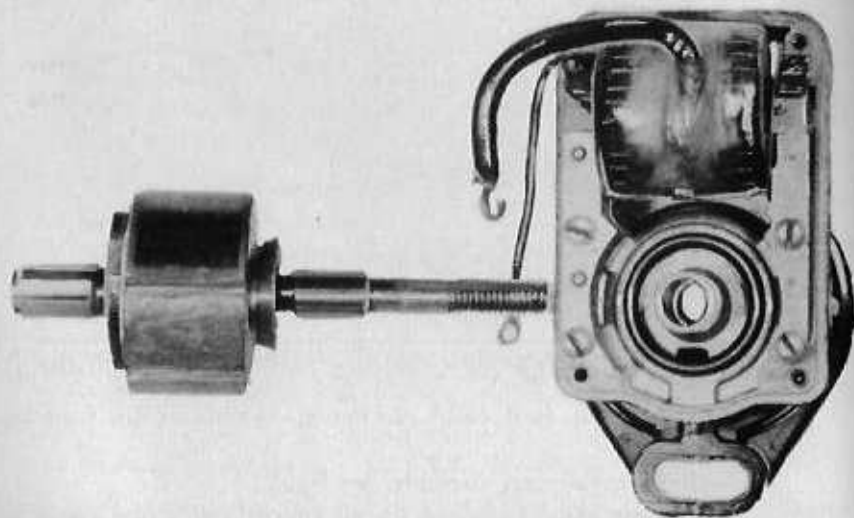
MAGNETO (SHOWING ROTOR REMOVED)
